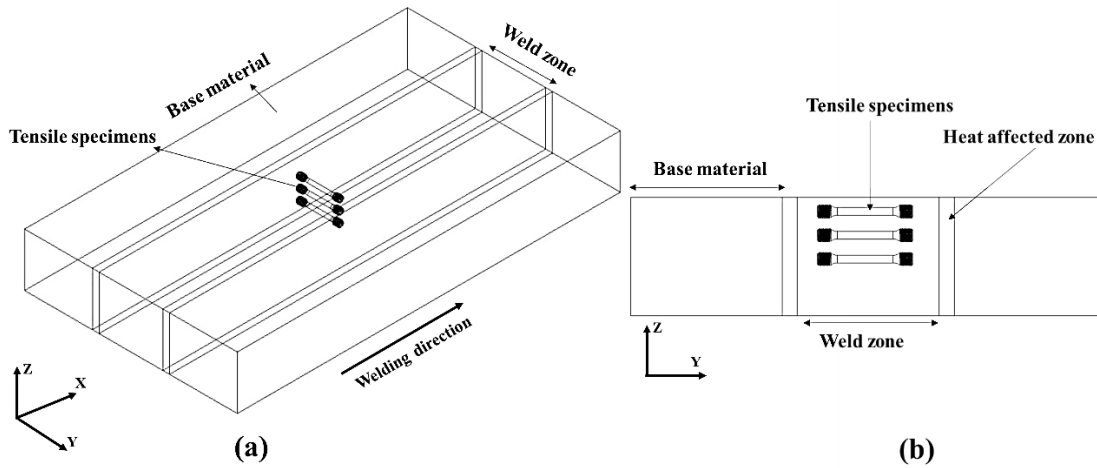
Schematic presentation of the extracted tensile test specimen from the welded block in (a) isometric view and (b) front view.
